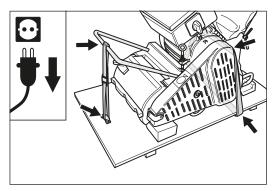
Transport or storage of the machine on the bottom part of the transport crate.
